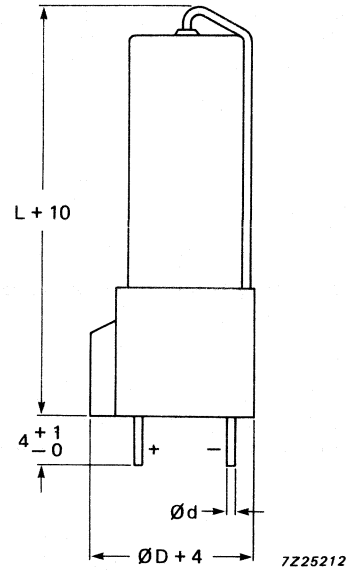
Component outline, style 3; for dimensions ϕd , ϕD and L see Table 3. Available to special order.
